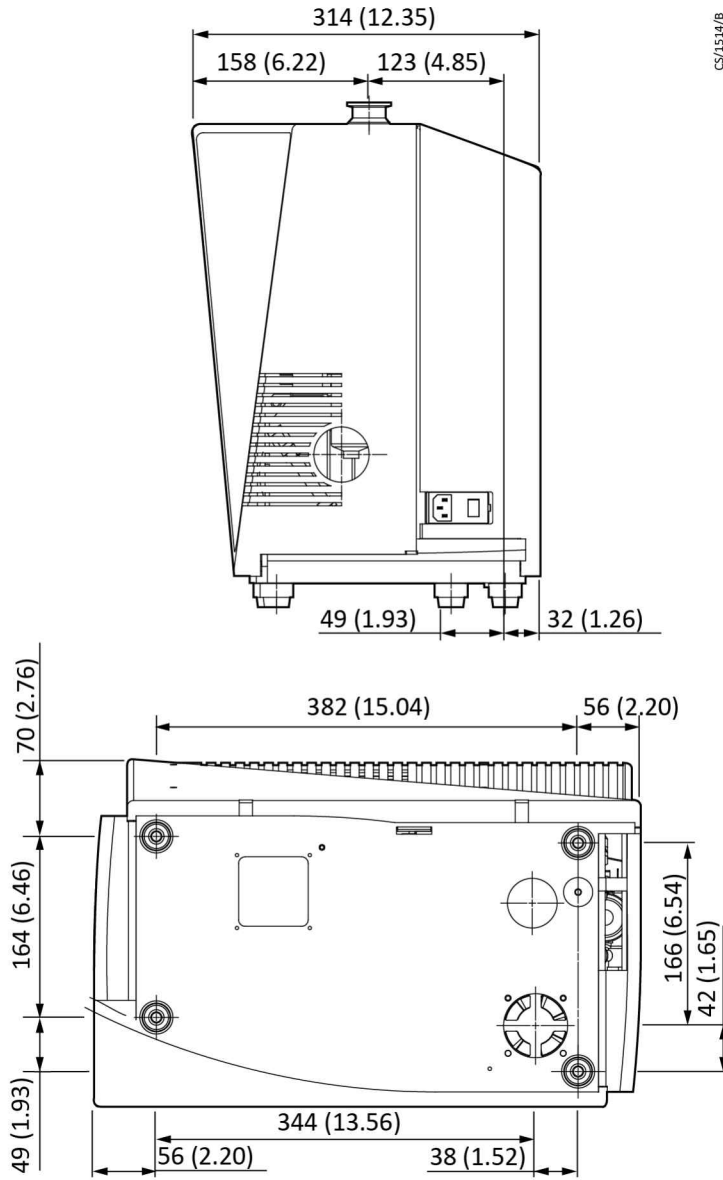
Dimensions ELD500 and ELD500 FLEX side view
